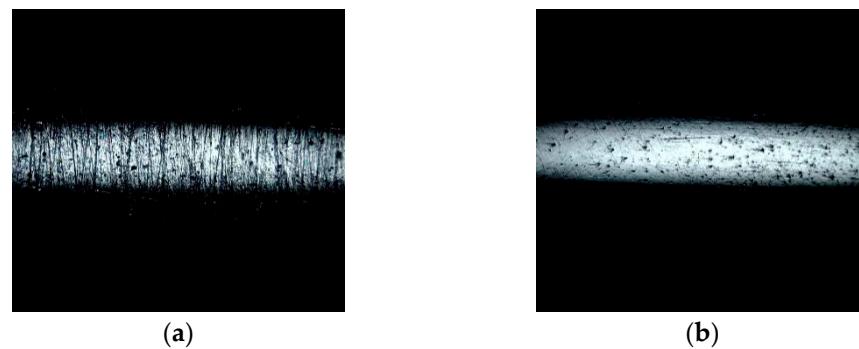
Micrograph of workpiece surface before (a) and after (b) machining.
